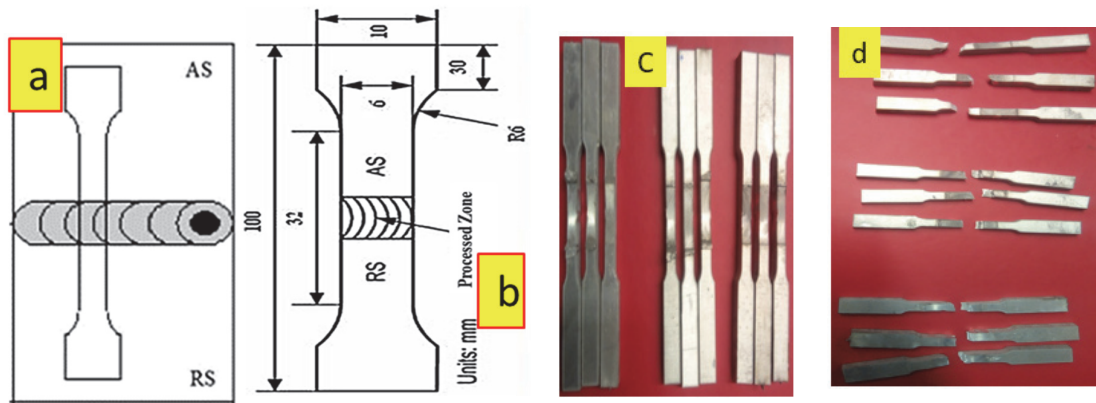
(a) processed zone showing section of tensile samples (b) illustration of tensile specimen (c) photograph of tensile samples (d) photograph of the fractured surface of tensile samples
